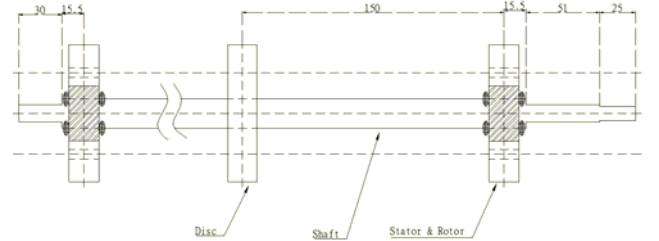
The schematic view of magnetic flexible rotor bearing system
